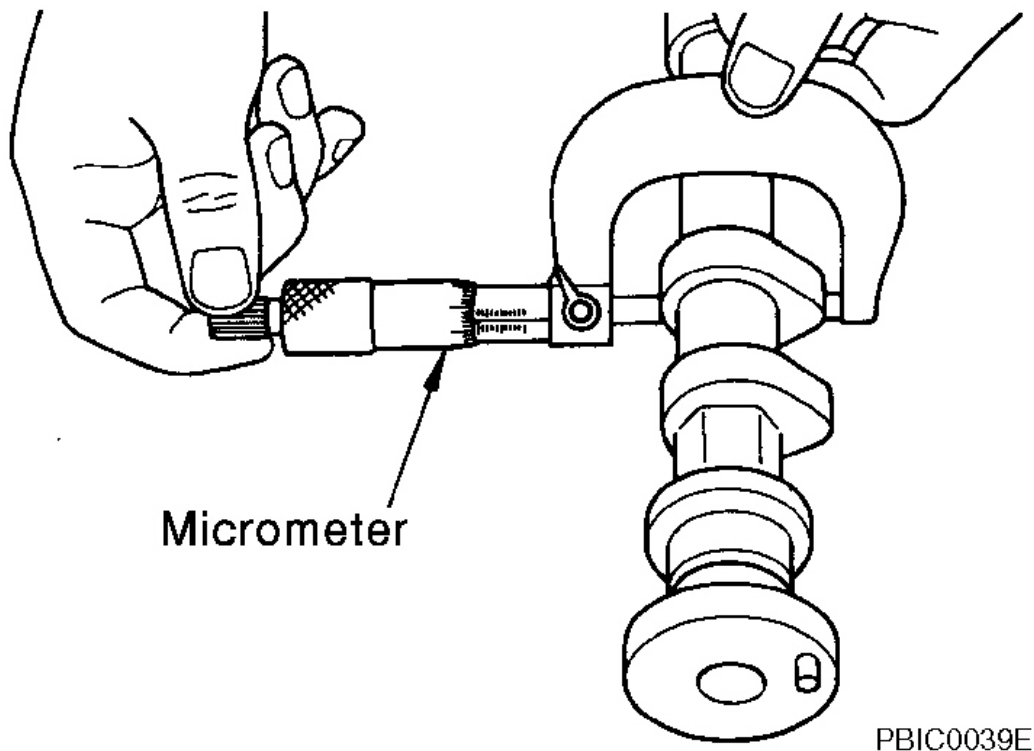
Identifying Camshaft Cam Height With Micrometer
